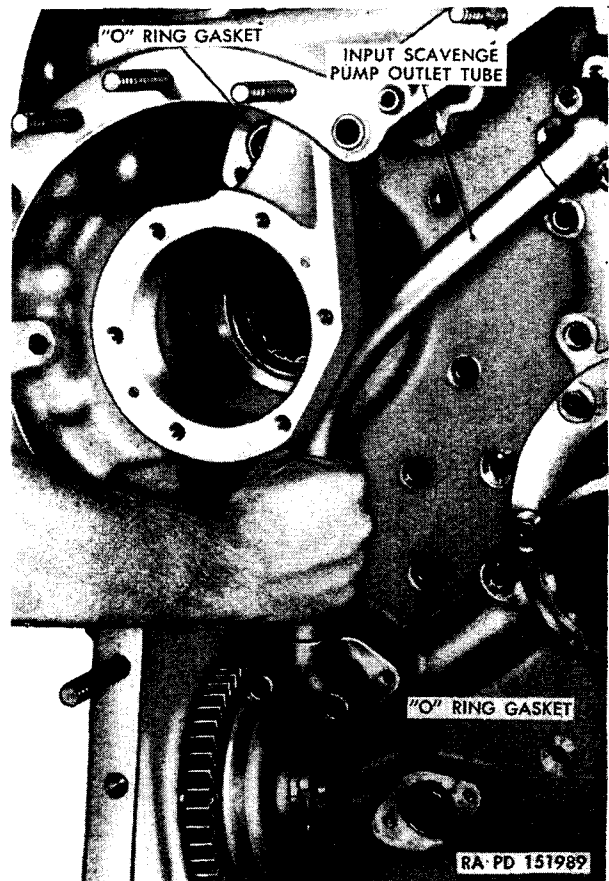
Removing or installing input-scamge-pump-outlet tube.
